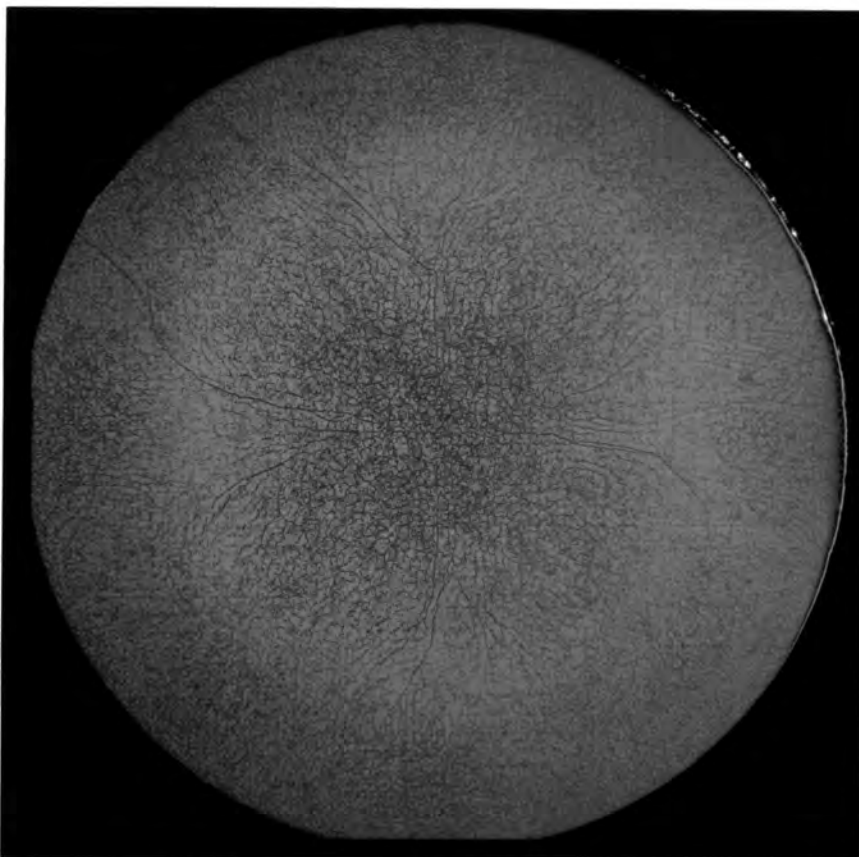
Sample MMT 76 T2 - KOH etch picture
